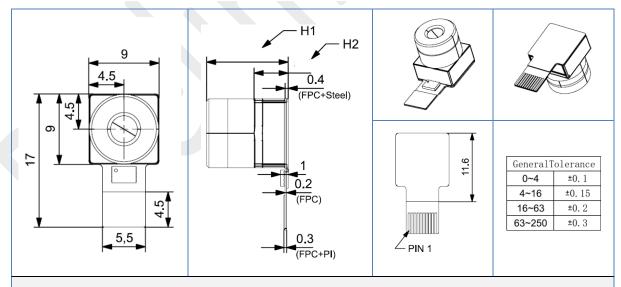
Dimension of PCBA, including the lens of MI0802Mxx. All dimensions are in mm, unless specified otherwise.
